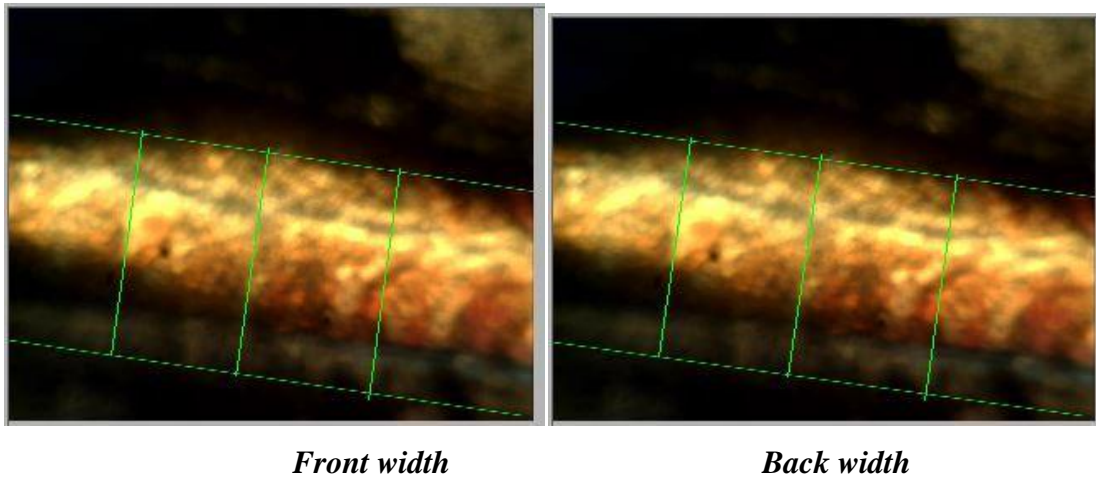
Weld bead geometry (Before polishing etching) at 100X
